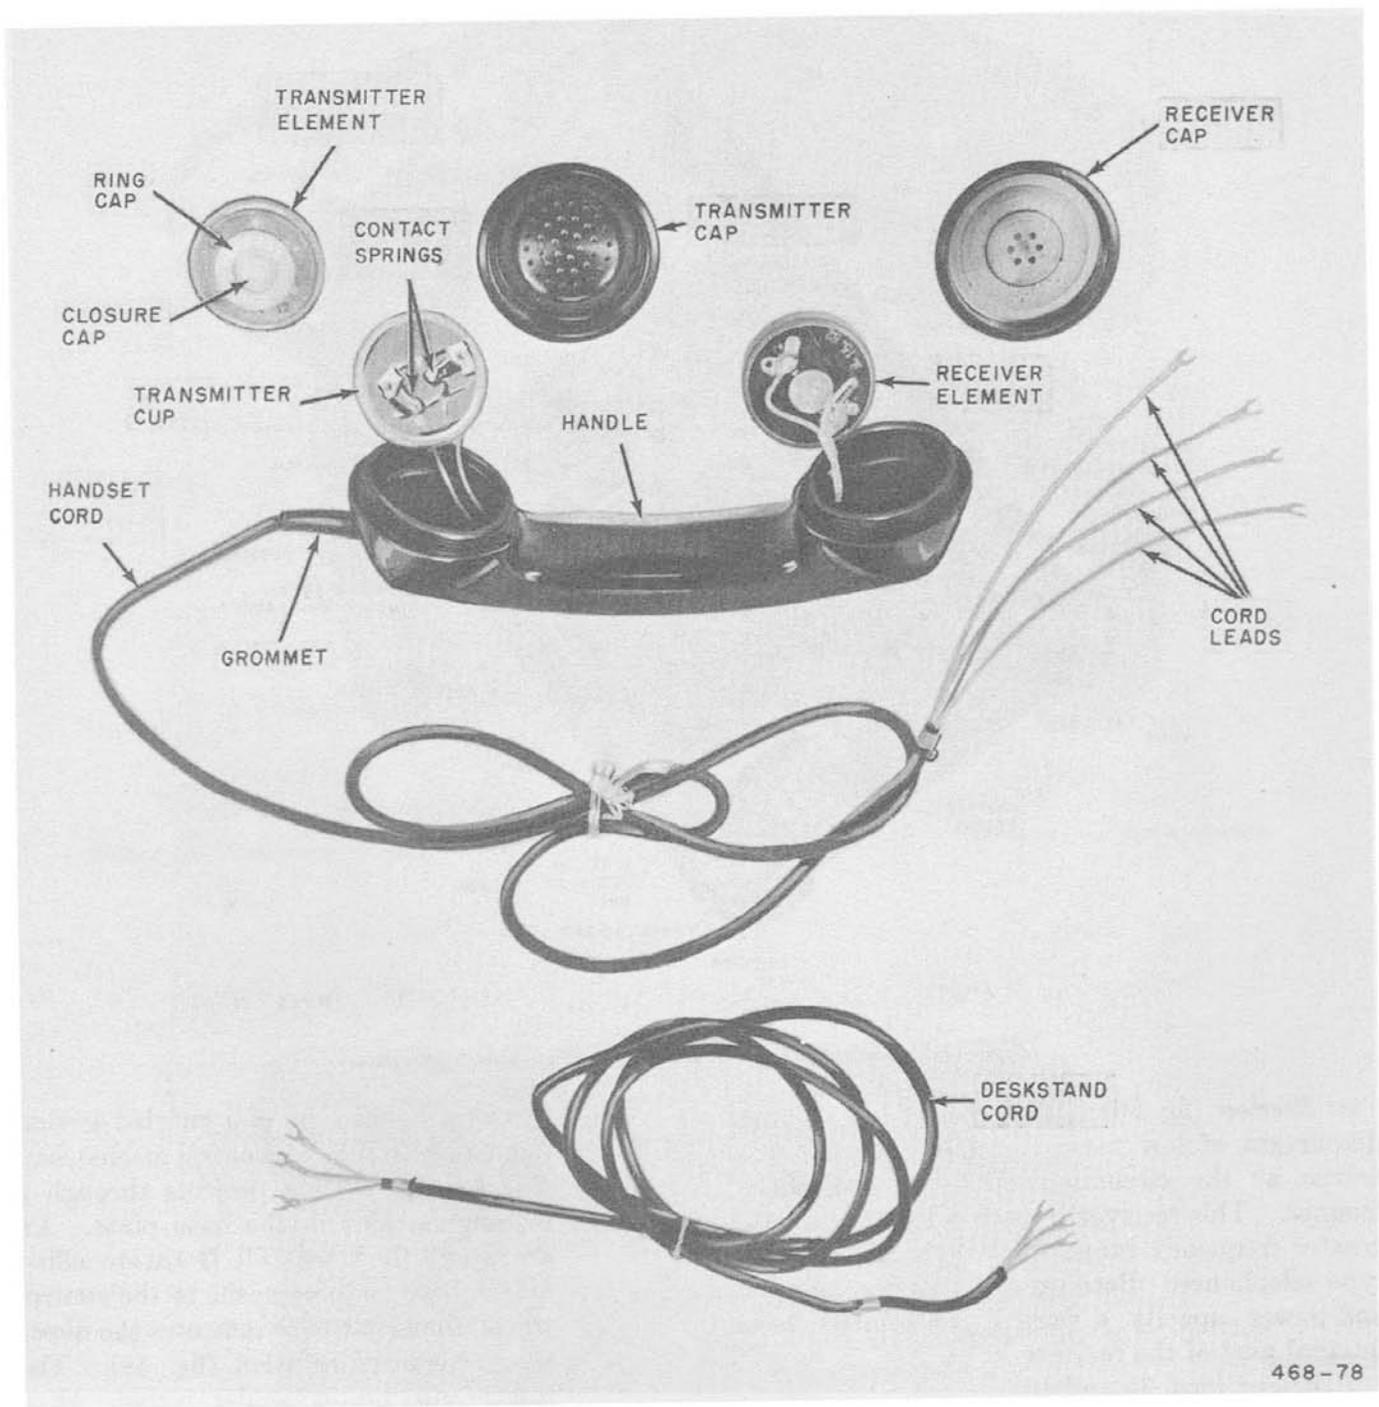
Handset for Telephone Set TA-236/FT, partially disassembled.
